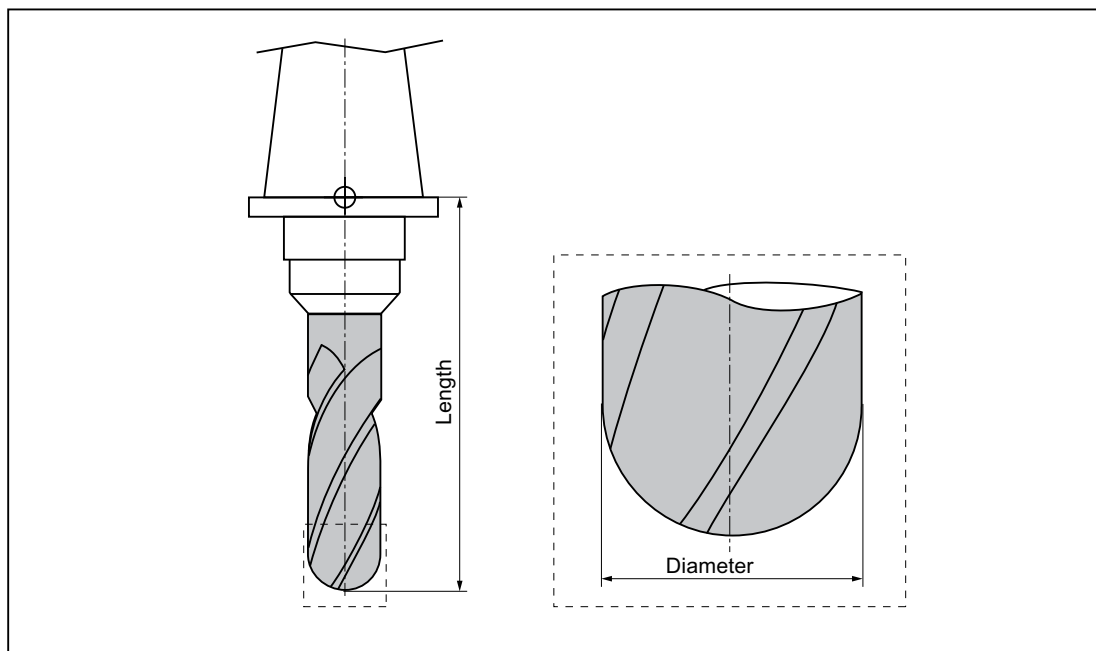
3D tool with an example of a cylindrical die-sinking cutter (Type 110)
